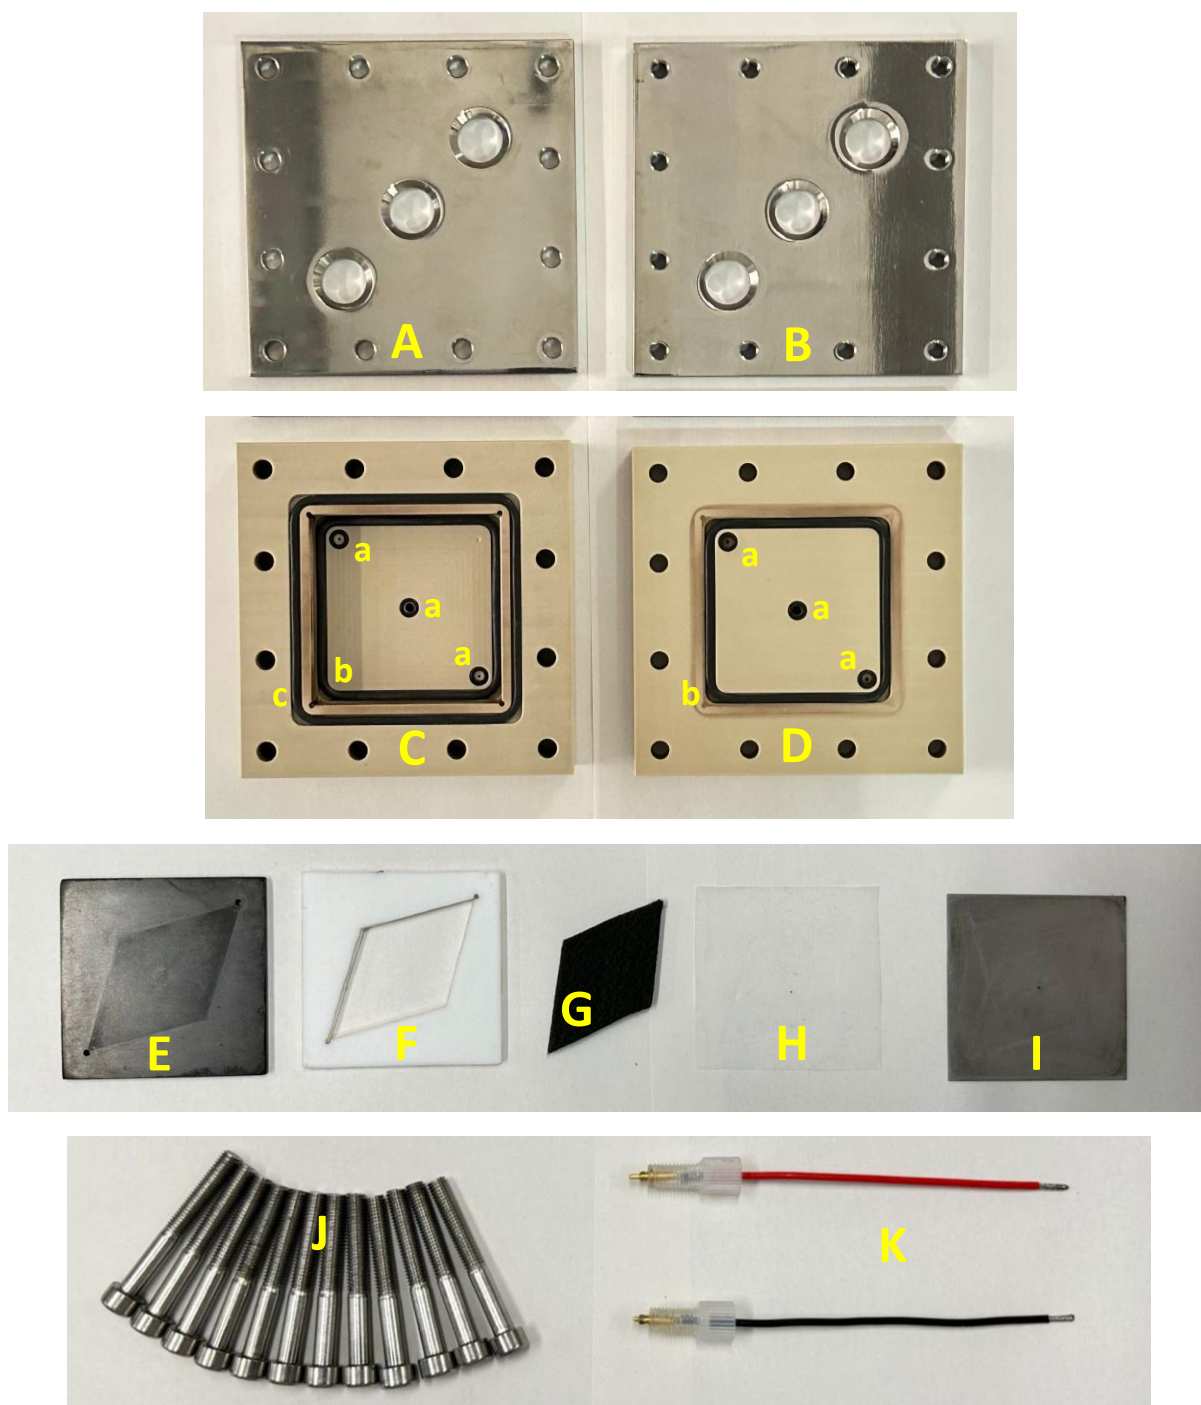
Reactor parts: A = steel end plate 12 hole $\text{\AA} 5.1$ mm, B = steel end plate 12 threads M5 x 0.8, C = PEEK bottom frame (outer dimension 88 x 88 mm, internal dimension 50 x 50 mm)-O-rings a = 3 id x 1 mm, b = 53 id x 2 mm, c = 67 id x 2 mm, D = PEEK top frame (outer dimension 88 x 88 mm), E = Impervious graphite current collector (50 x 50 mm, 2 hole $\text{\AA} 0.8$ mm, thickness 3.2 mm), F = PTFE anode frame (50 x 50 mm, 2 x 1.25 mm thickness), G = rhombus shape carbon felt AvCarb G280A (30 mm x 52 mm), H = PTFE mesh size 18 x 28 (outer dimension 50x 50 mm), I = stainless steel plate cathode (50 x 50 mm, thickness 0.3 mm), J = screws (M5 x 0.8, 40mm length), K = pogo pins for electrical connection
